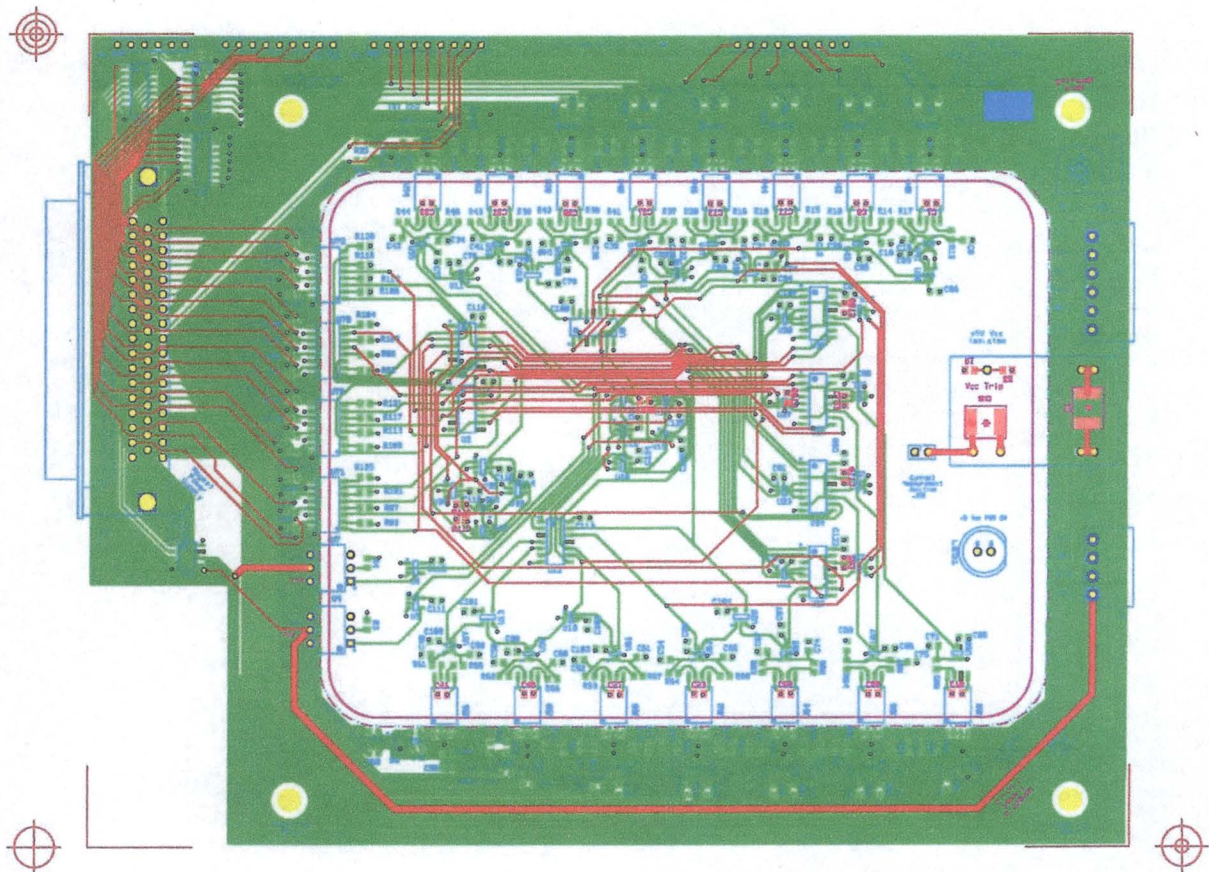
Part of N.I. Ultiboard layout for compilation to a Gerber file – PCB-with-Components Prototype
